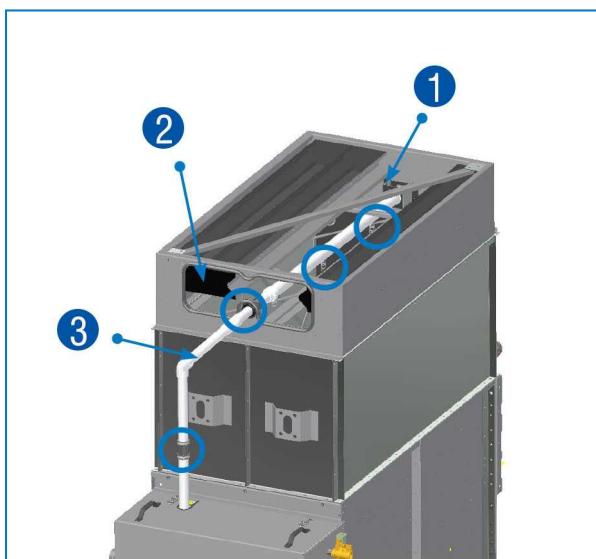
1. Spray pipe install, 2. Eliminator install, 3. Upper pipe install.
